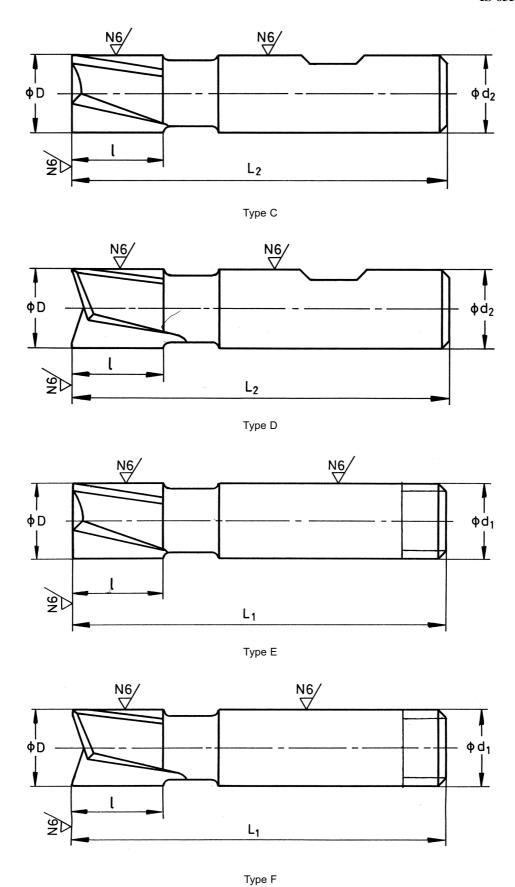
Dimensions for Slot Drills with Parallel Shanks
